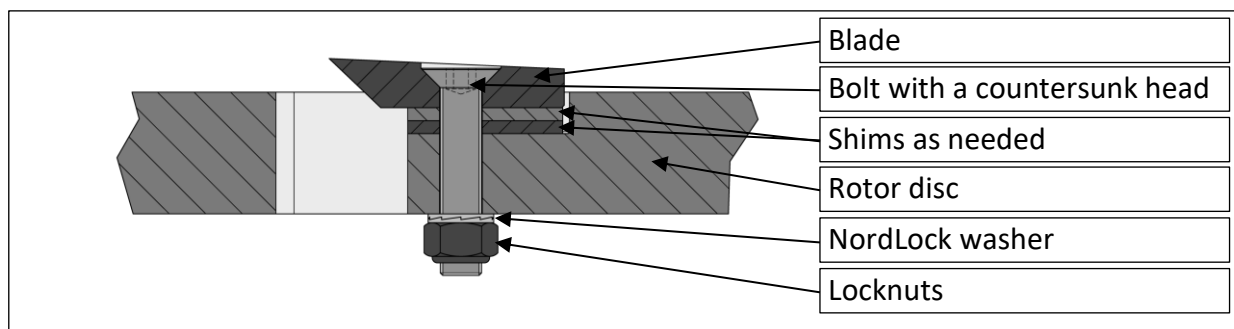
Blade cutting height adjustment, PC-3300-PEC and PC-3300-PIC
